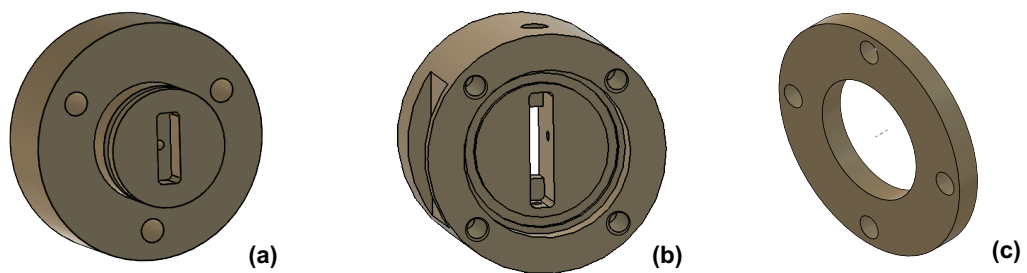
(a) CAD model of part (1) of the coalescing separator. (b) CAD model of part (2) of the coalescing separator. (c) CAD model of part (4) of the coalescing separator.
